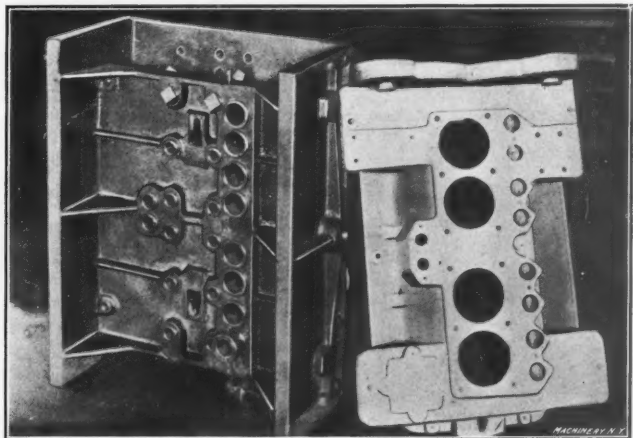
Drilling and Reaming Jig for Upper Crank Case, also showing Model Drilling and Reamer Rack in the Background
